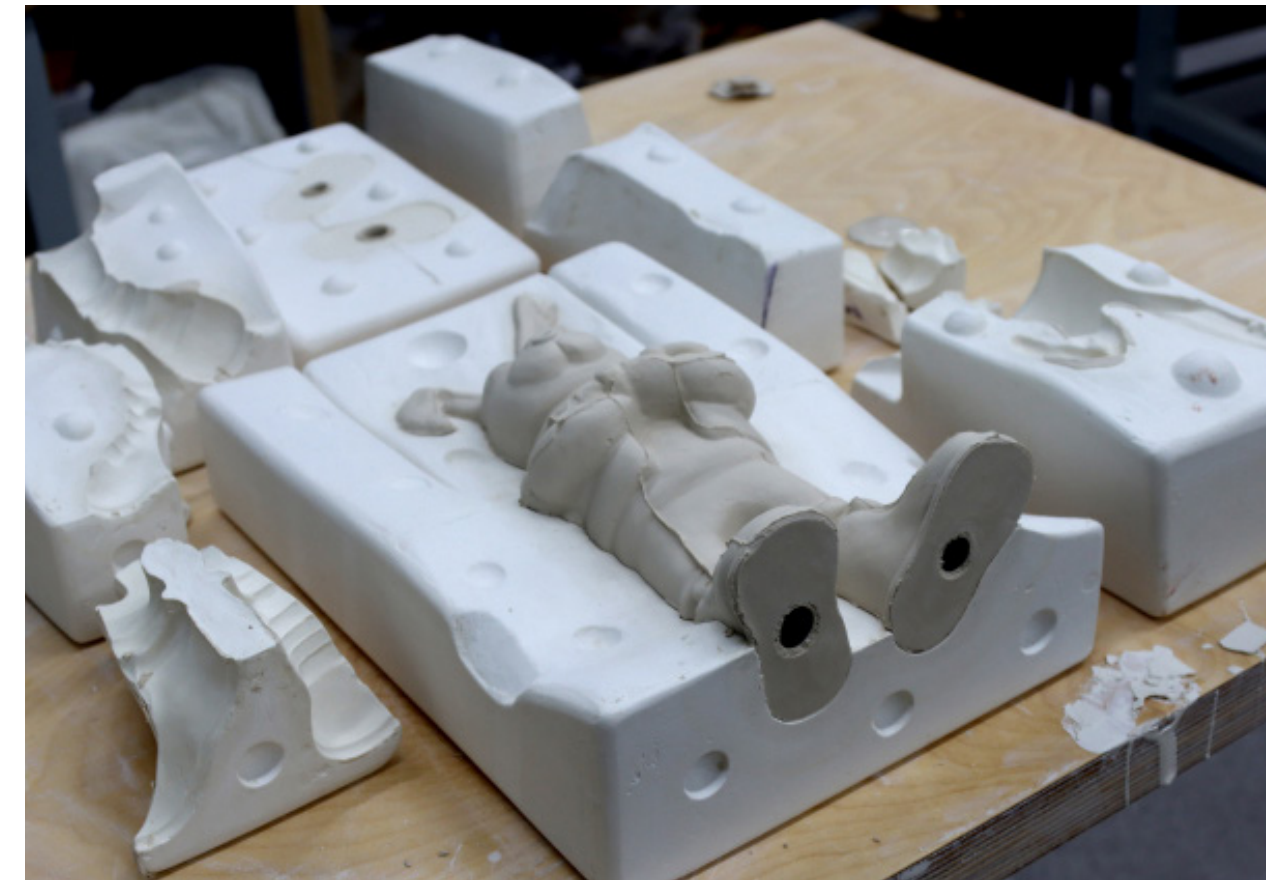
Mold example: multi-part sculpture mold. Mold Liisa Kaunisvirta
